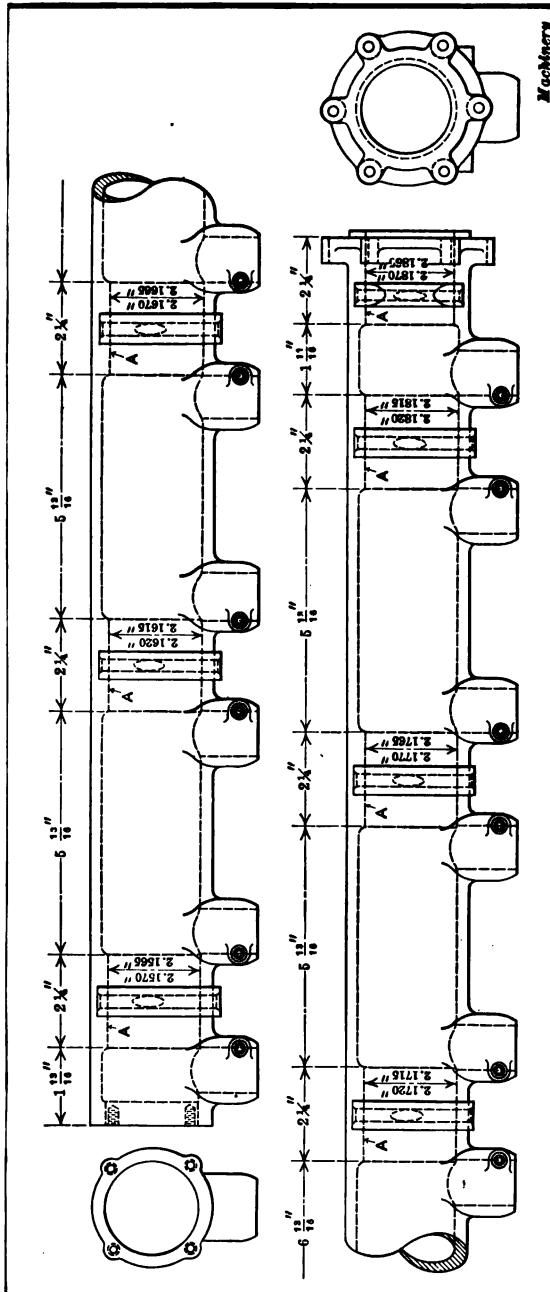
Cam Frame of an Engine in which Seven Bearings A are finished by broaching
